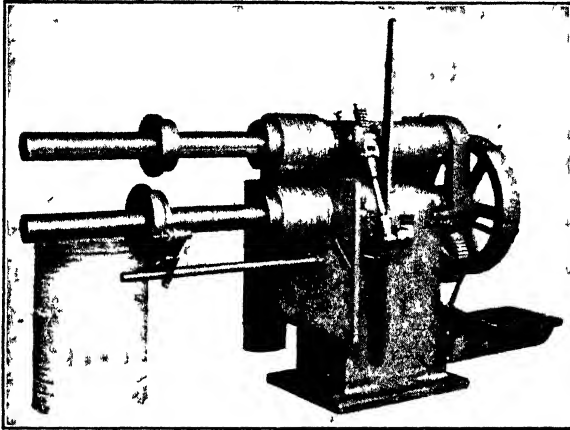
A relatively large machine belonging to the hand-controlled series of bead-ers and flangers, equipped to bead one end of a pieced barrel while flanging the other end
